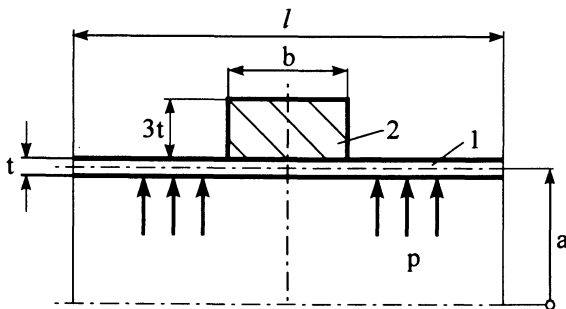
Pressurized tube with shrunk reinforcing ring
